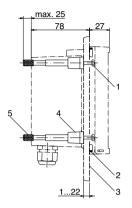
51205989-001 protective hood for wall and pipe mounting
